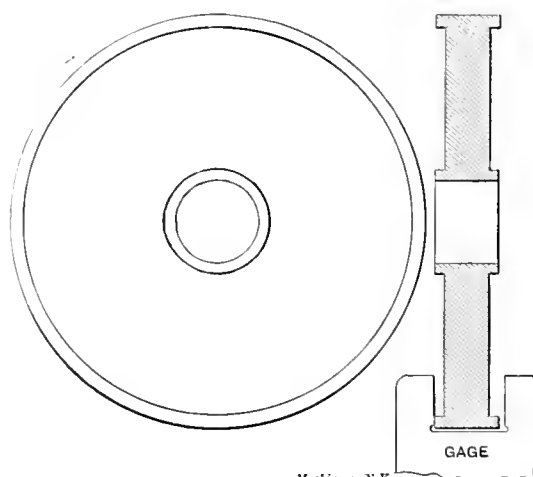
Cast Iron Lap adapted to Lapping between Jaws.
